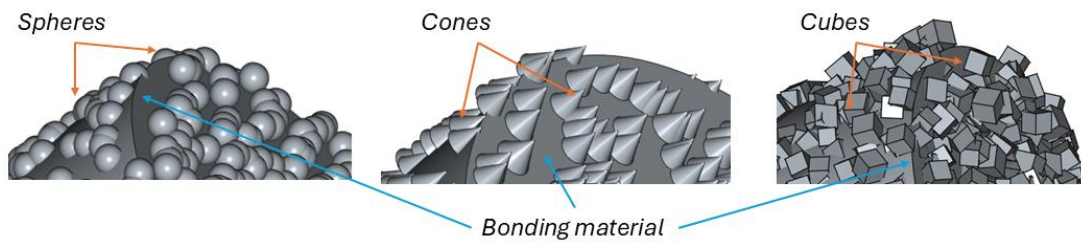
Selected primitives that can be used for grinding pin diamond/CBN grains design
